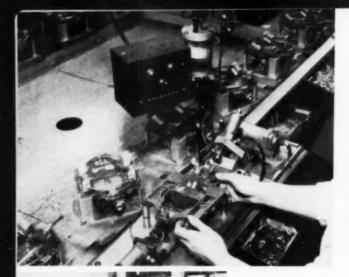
A portion of the four-jet carburetor assembly line. Major sub-assemblies are built up at other areas, inspected, and delivered to the line by conveyor. Assembled carburetors are transferred to a belt conveyor for transport to the flow stands.
